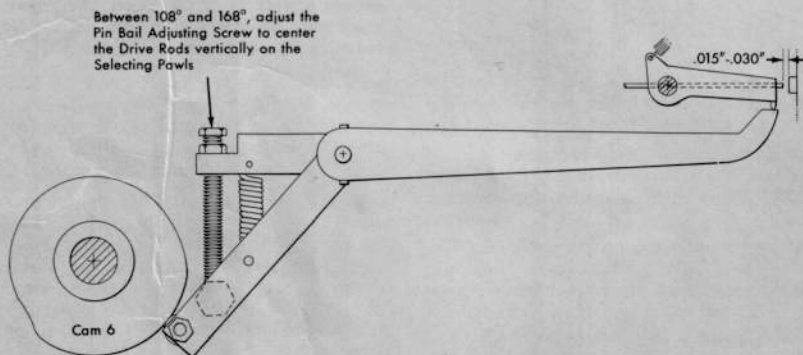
Drive Rod Clearance and Pin Bail Adjustment
